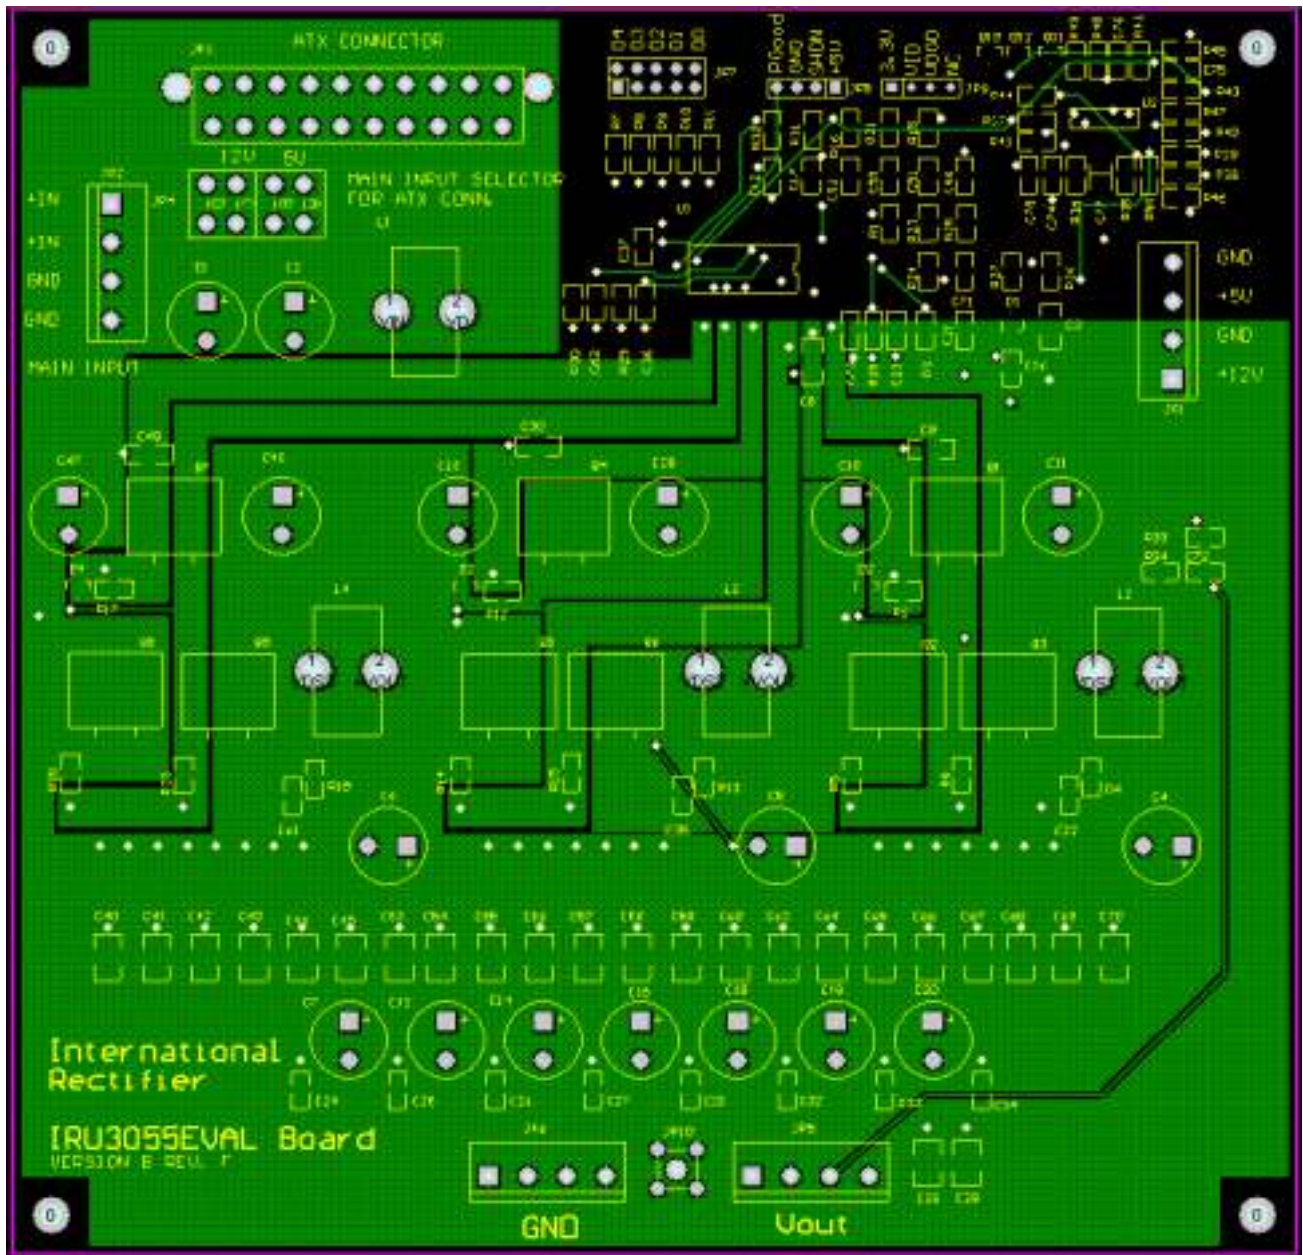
Third layer of IRU3055 demo-board PCB layout.
